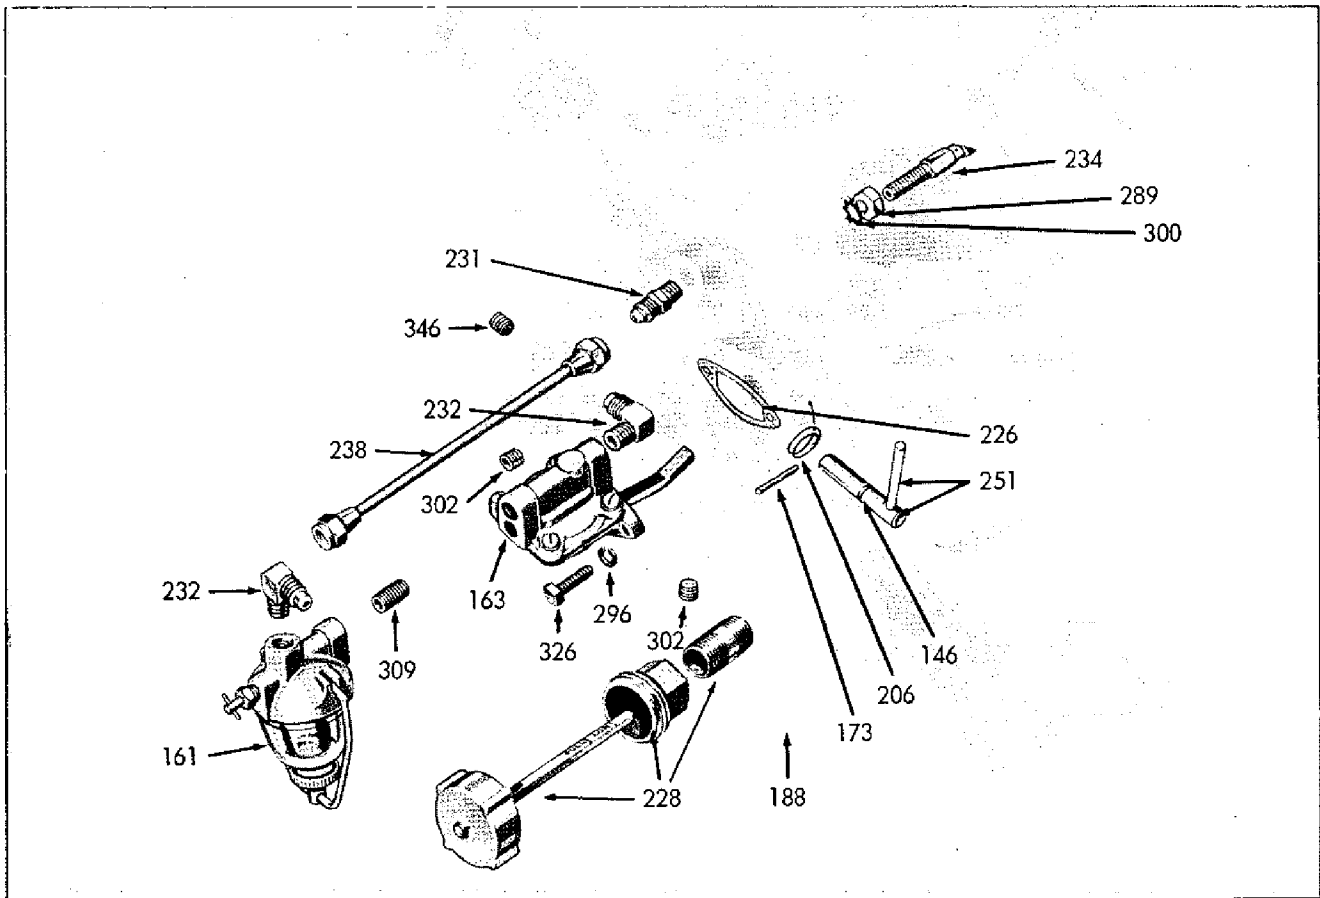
, FUEL PUMP, OIL GAUGE AND OIL SPRAY NOZZLE GROUP
